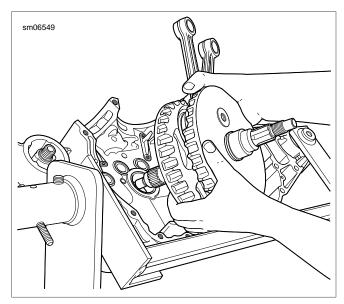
Removing Flywheel Assembly From Right Crankcase Half
